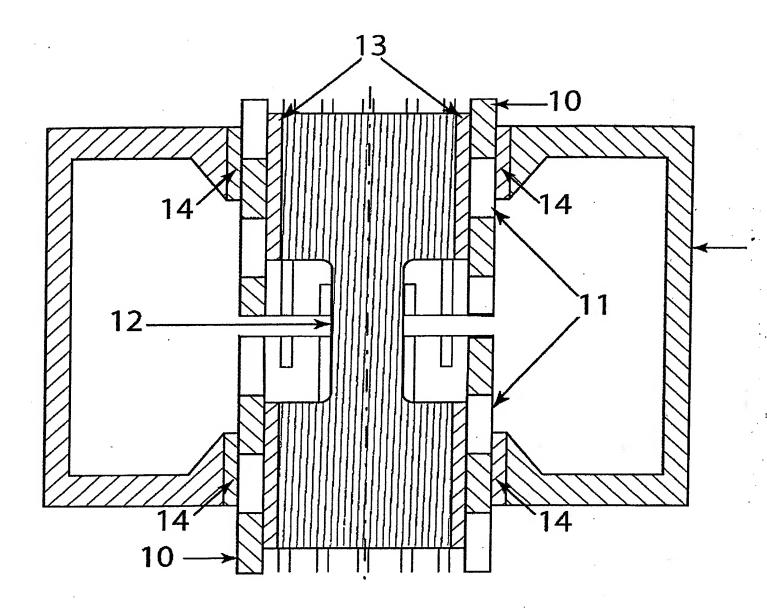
Seal assembly for forge welding of a slotted expandable tubular.
